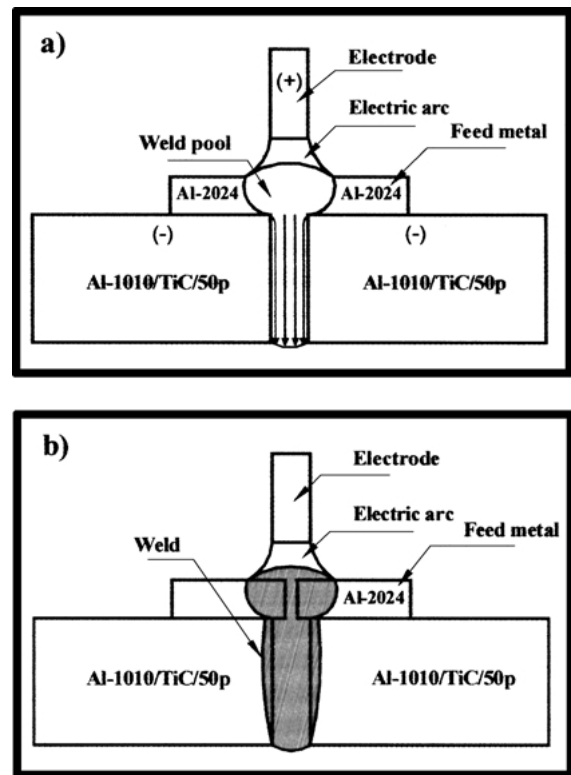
Schematic drawing of the MIG welding process with IEA: (a) flux of molten metal into the joint and (b) profile of the weld upon freezing.
